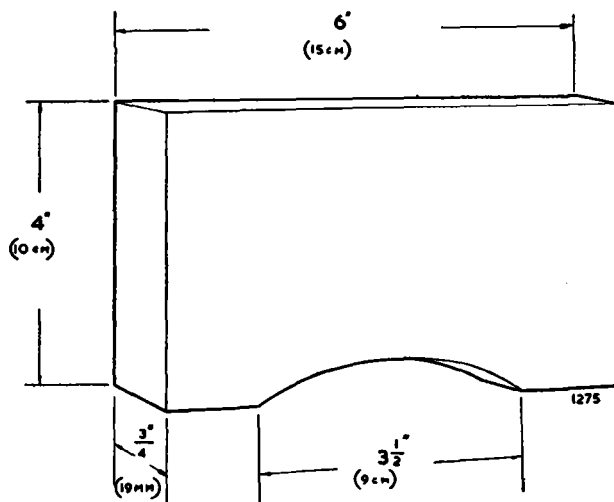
Showing a fibre block which can be made up and used to support the Upper Wishbone Levers when carrying out certain operations on the Front Suspension Assembly.
